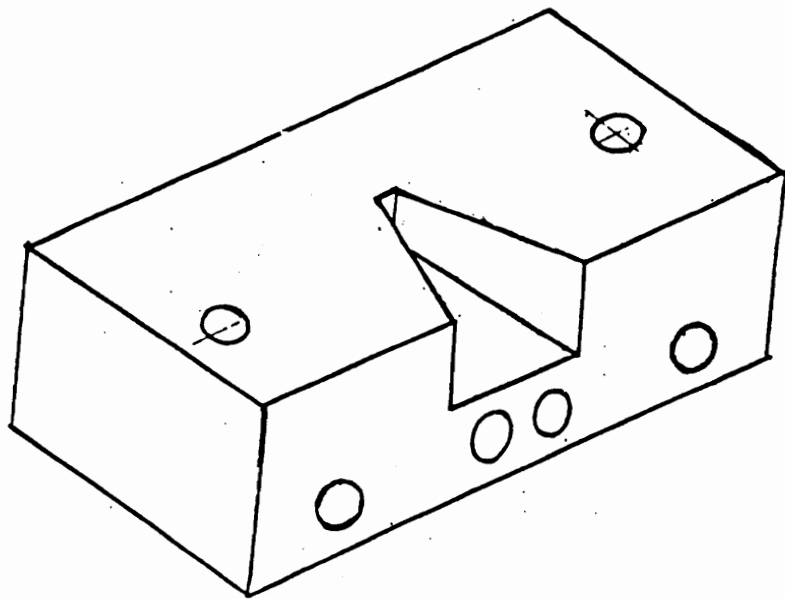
(a): Isometric view of the bottom half of the inlet section
